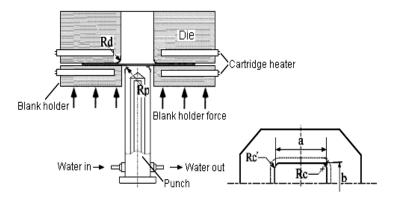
Schematic of rectangular cup deep drawing system with local heating and cooling.
